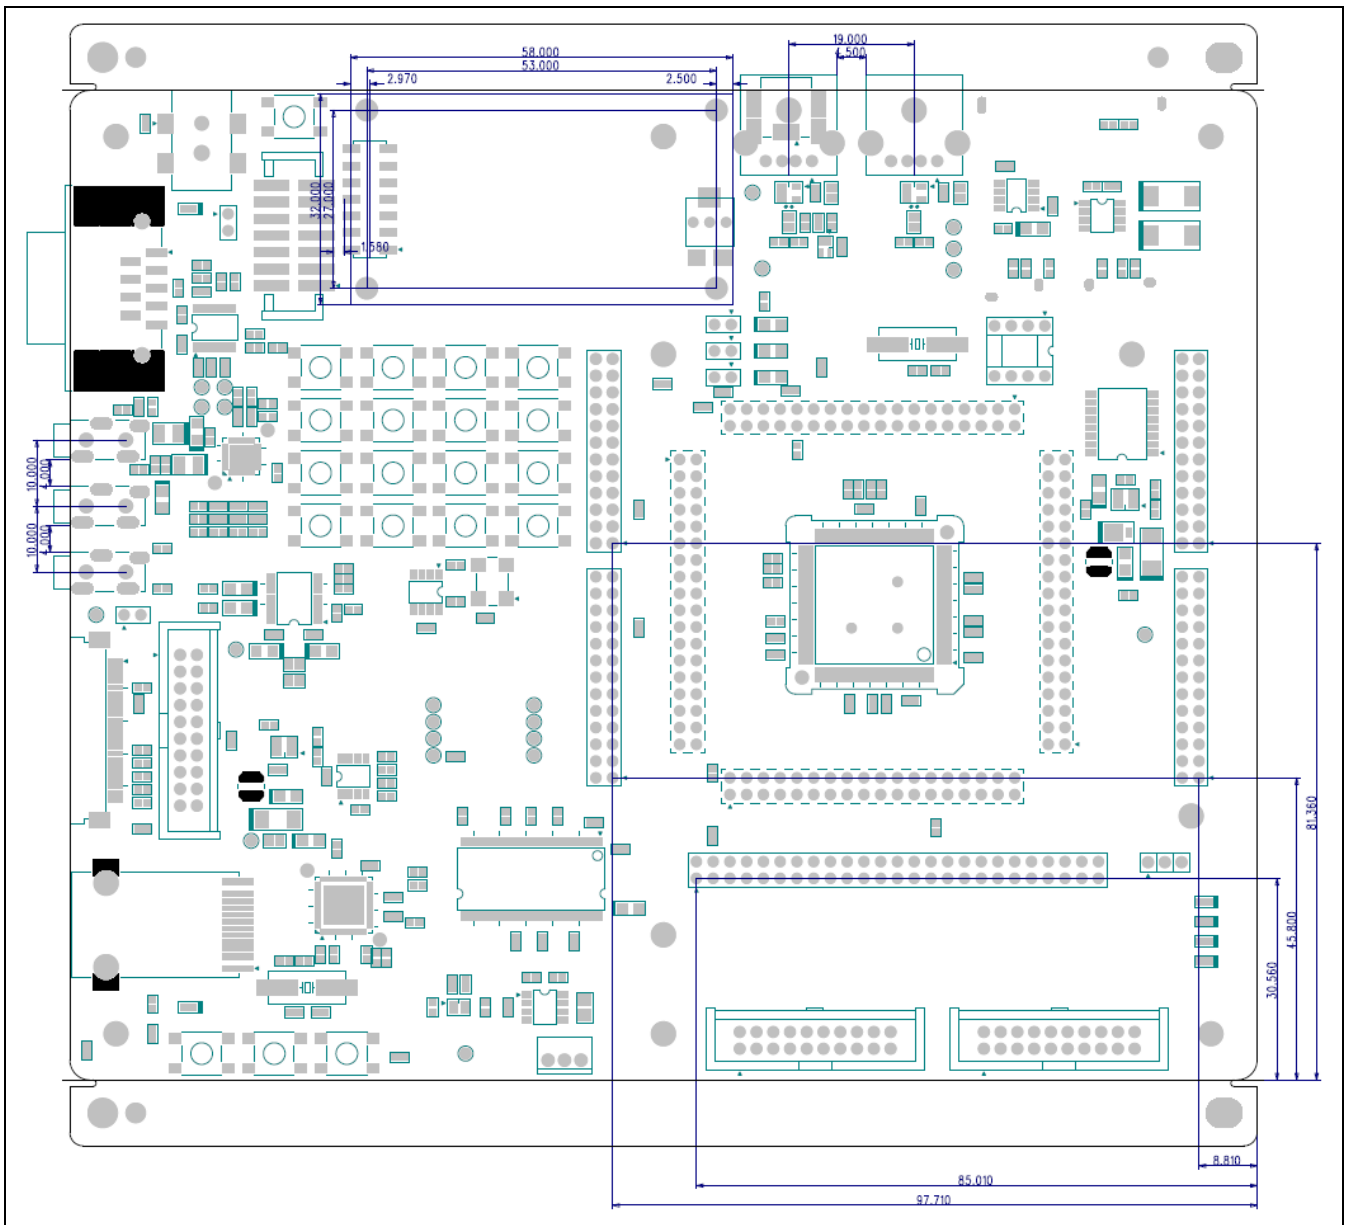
R0K5726B0C000BR Dimensions 2 (Top view of the component side)
